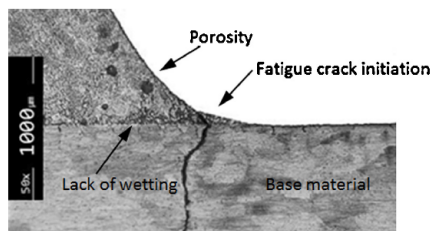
Fatigue crack initiation site on a MIG weld.
